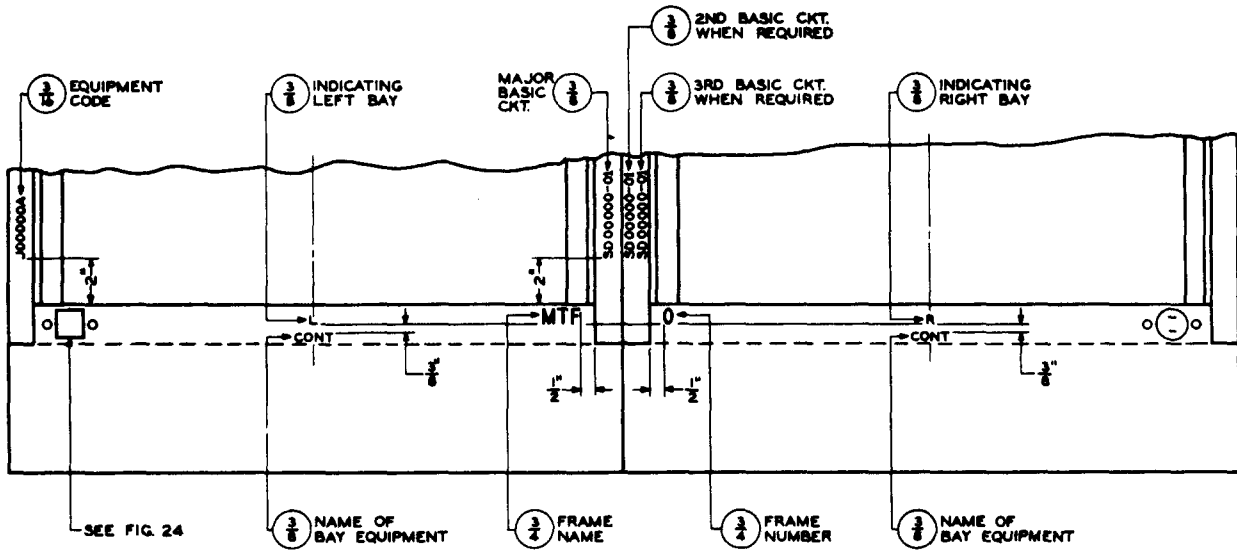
Front View of Double-bay, Box-type Frame Base
